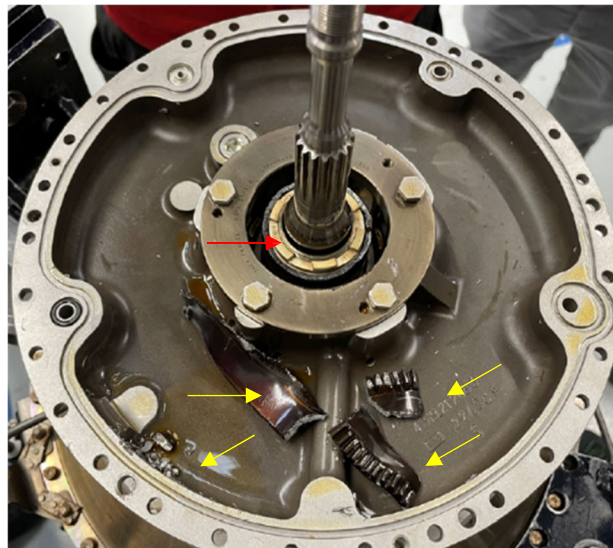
Rear of the *accessory gearbox* with the fragments of the drive gear (yellow arrows) and its main body (red arrow)
